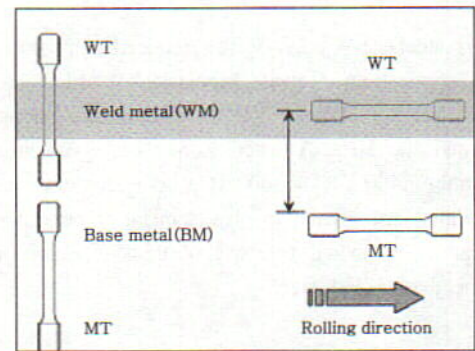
Preparation of tensile specimens from weld coupon
